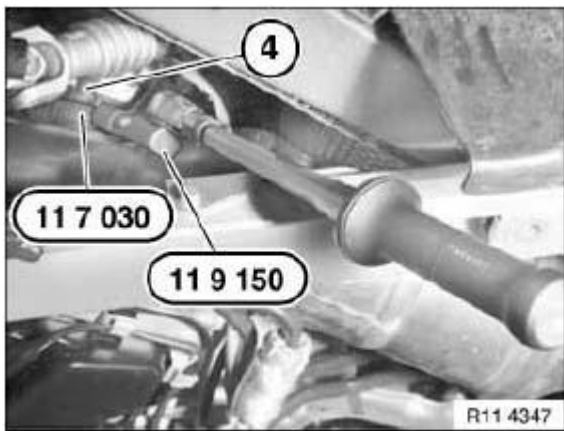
Identifying Special Tool (11 7 030) And (11 9 150)
